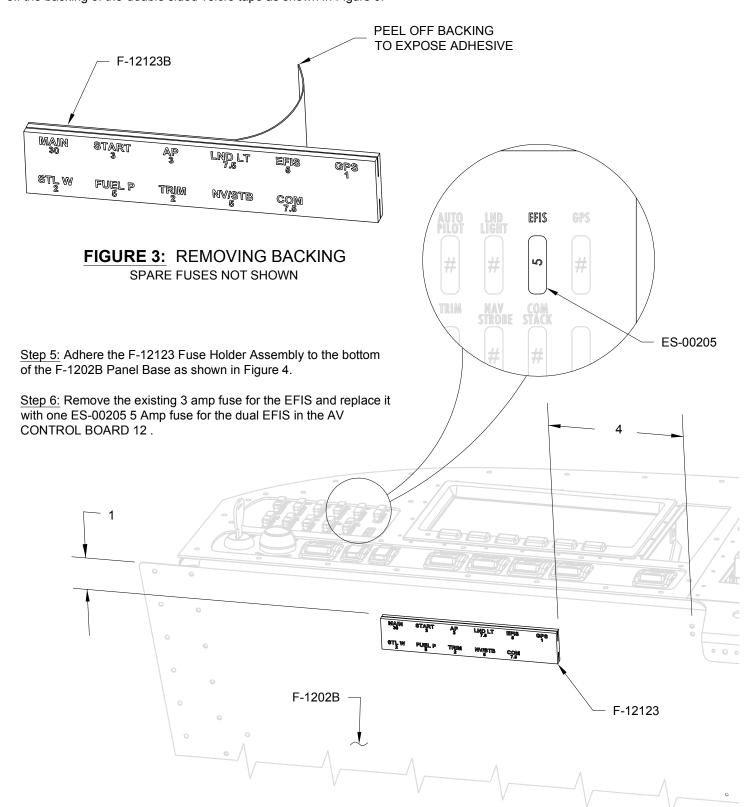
INSTALLING FUSE HOLDER ASSEMBLY TO UNDERSIDE OF PANEL BASE SPARE FUSES NOT SHOWN
